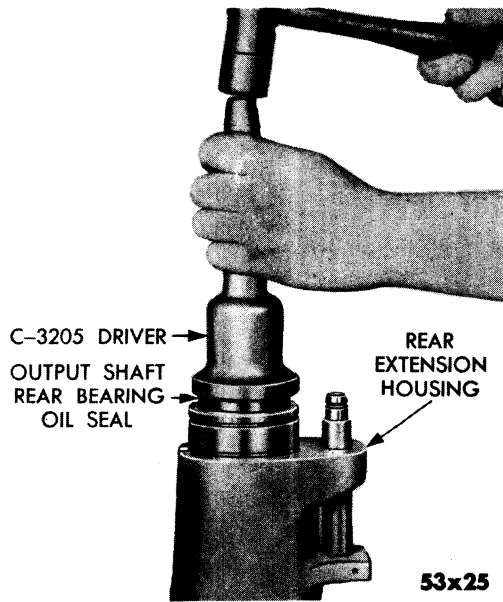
Installation of Output Shaft Rear Bearing Oil Seal
